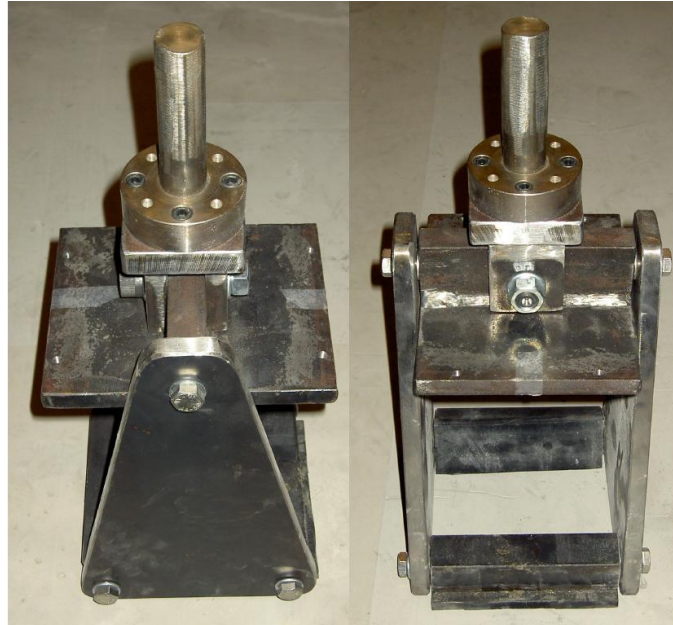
Custom-welded self-centring anchor clamps
